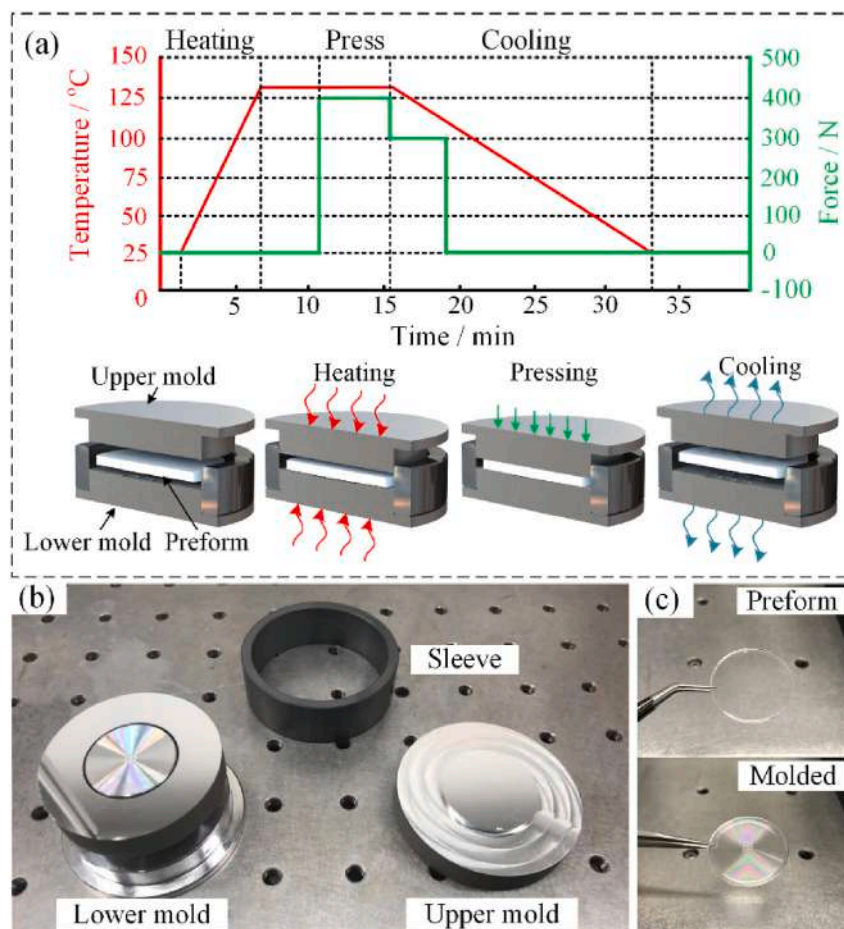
Schematic diagrams of (a) precision glass molding process, and photographs of the (b) Fresnel micro-lens array mold assemblies, and (c) preform and molded Fresnel micro-lens array.
